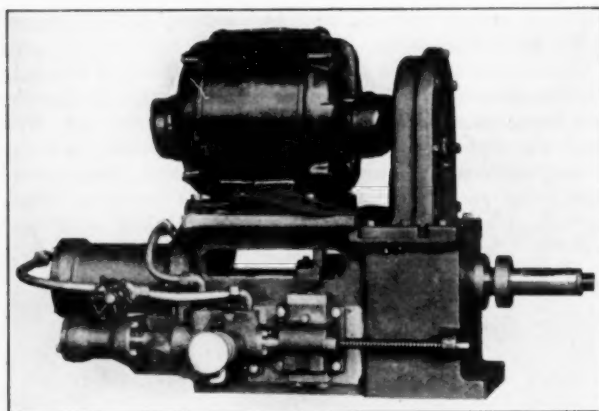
3-IN. SELF-CONTAINED HYDRAULIC-FEED DRILLING UNIT FOR USE IN CONSTRUCTING WAY DRILLING MACHINES
